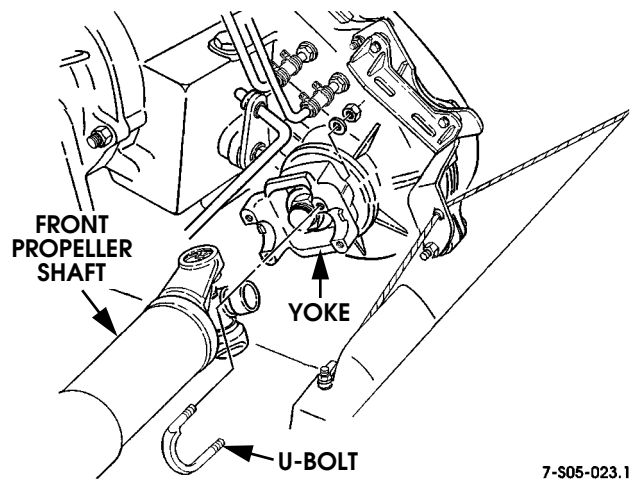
Disconnecting/Connecting Front Propeller Shaft
